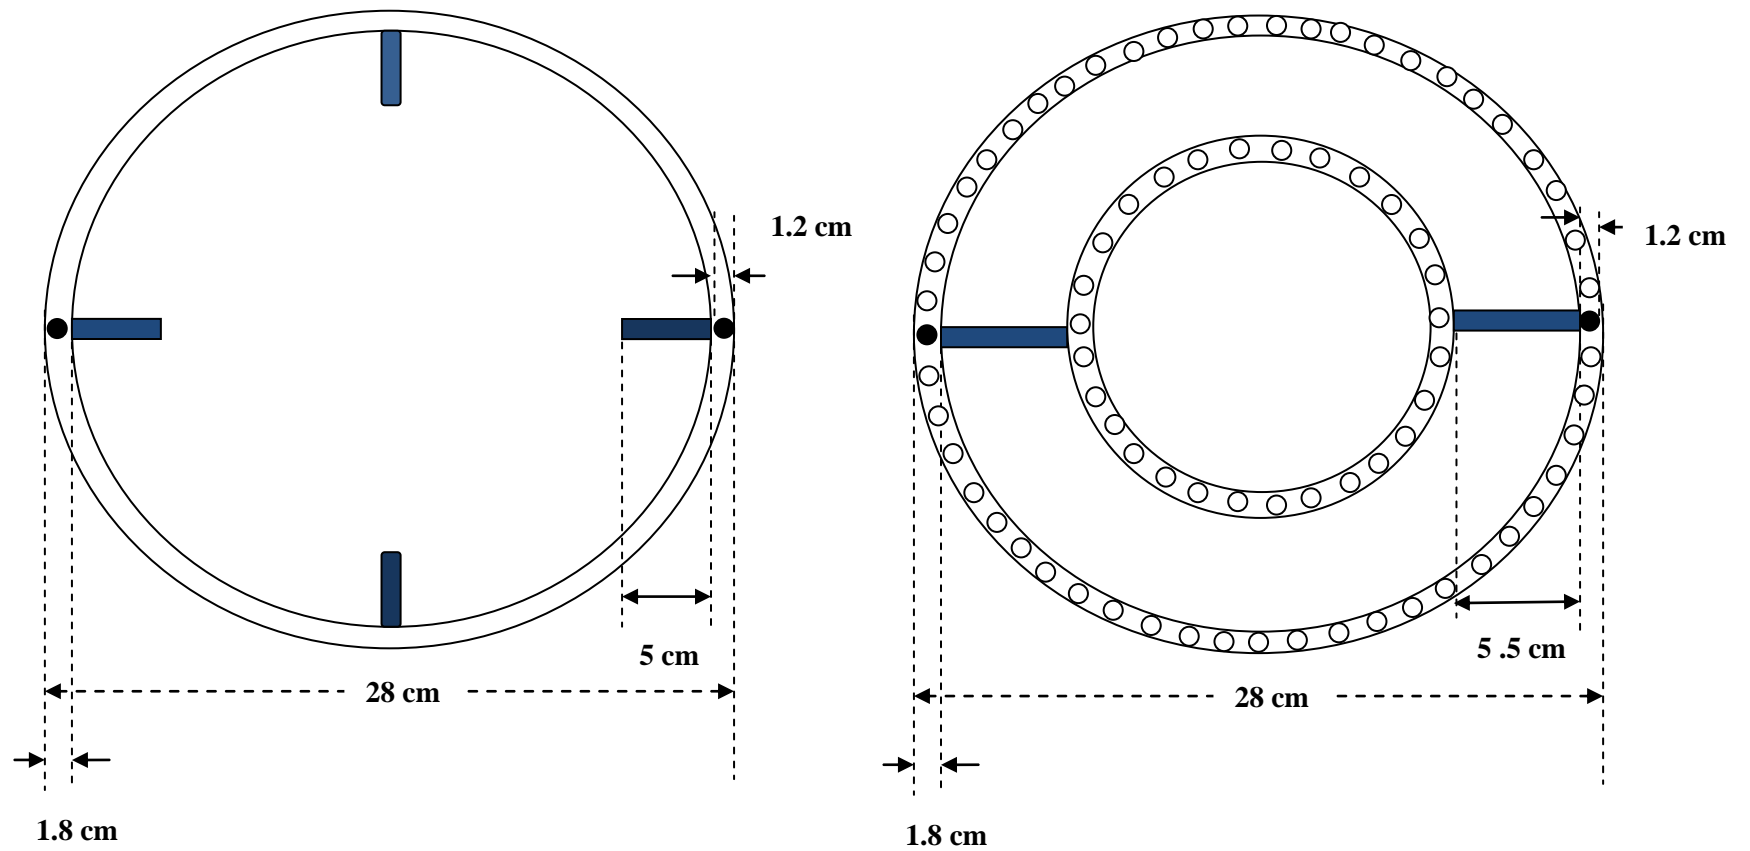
Geometrical parameters of the sparger used (a) jet nozzle, (b) ring sparger.
